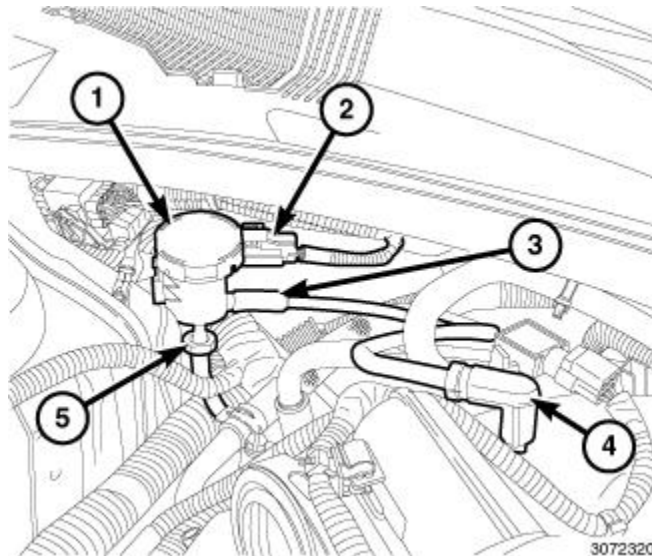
EVAP Purge Solenoid, Electrical Connector & Vacuum Lines
